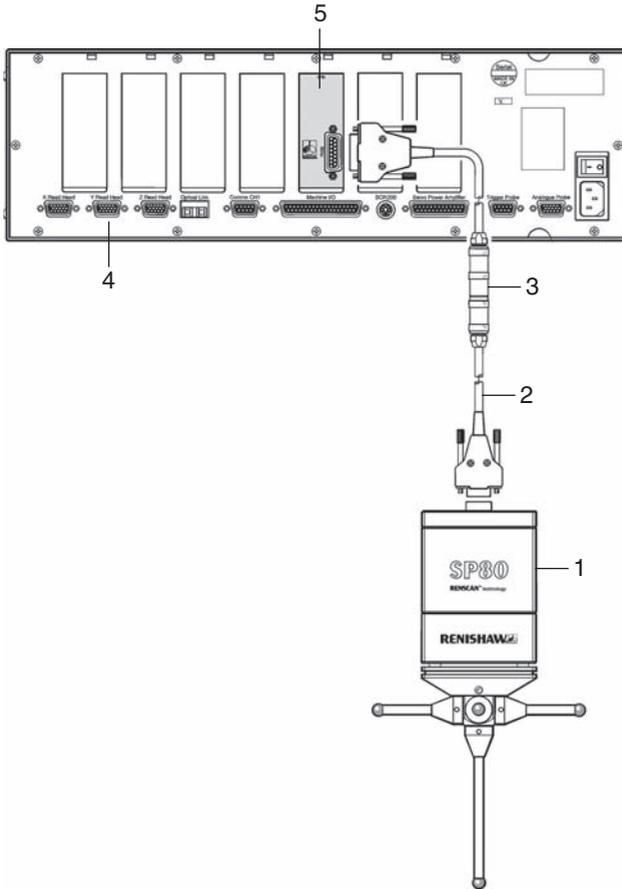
Connecting SP80 > SM80 > head cable > machine cable
